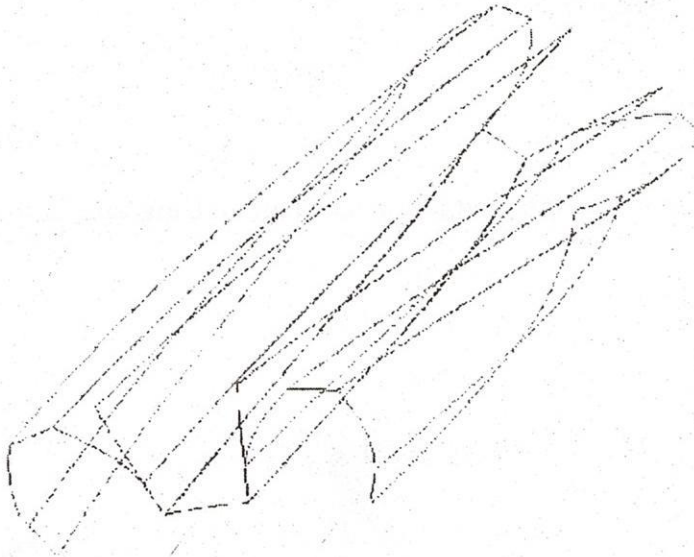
The surface model for making tool path of one gear slot in Unigraphics II software
